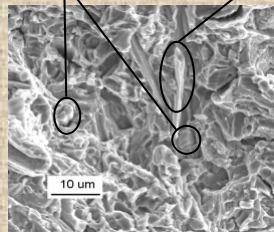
SEM image of the fracture surface of TMC exhaust valve
